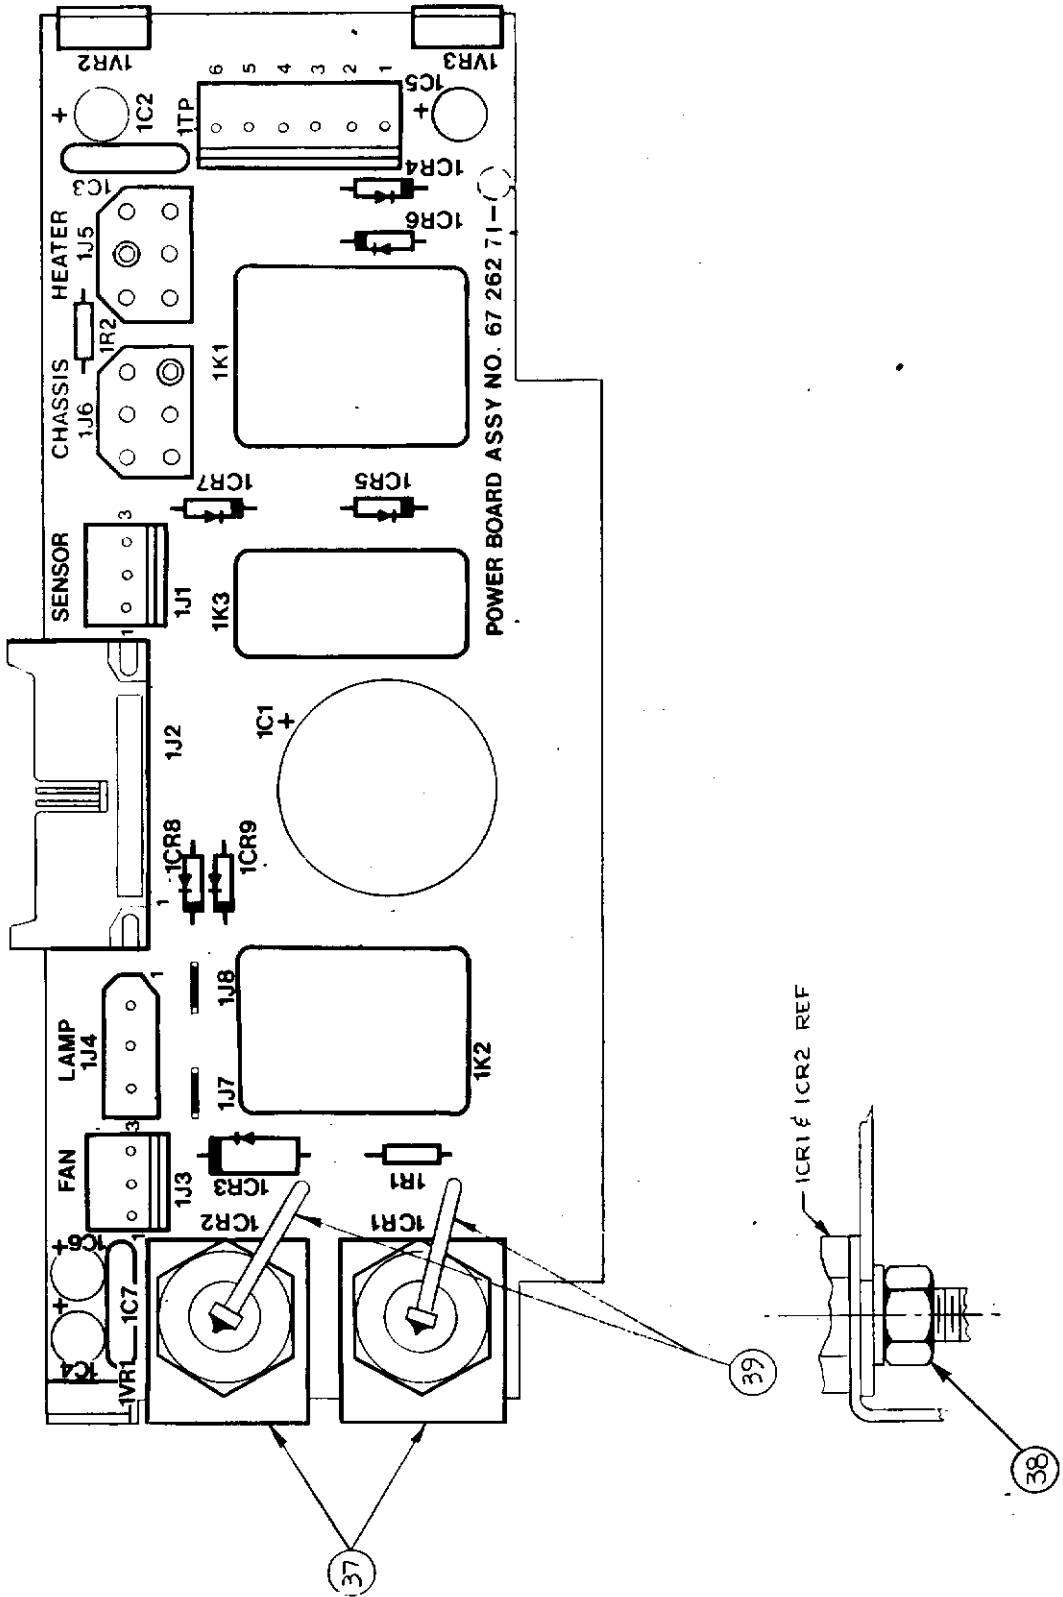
PARTS LOCATION DIAGRAM, POWER BOARD ASSEMBLY
